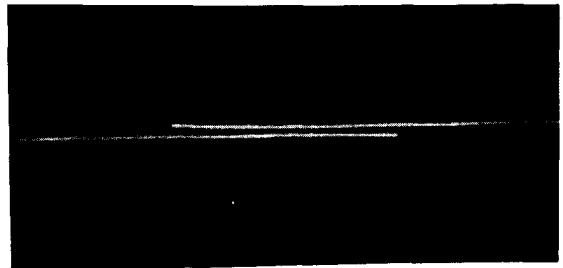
Shape of fatigue fractured specimen HS x GA, P=1667N $N_f = 5.16 \times 10^6$ cycles, 25Hz
